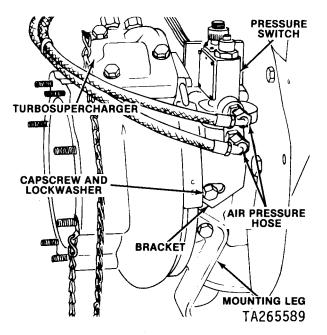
Removing or Installing Right Bank Dust Detector Pressure Switch
